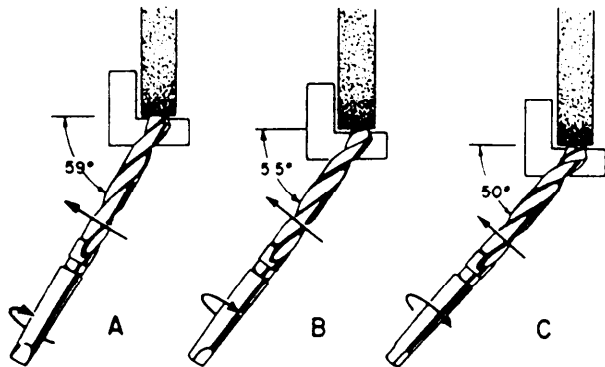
Three steps for grinding a twist drill with a grinder.
